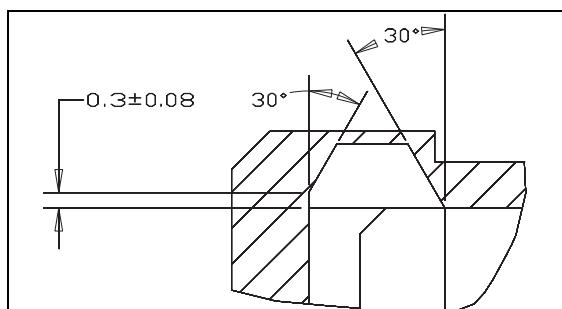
Slimline device plug connector interface dimensions (detail F)
